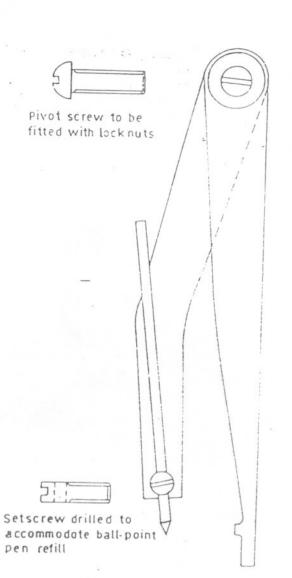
Odd-leg marking gauge (components & assembly) (Clause B_3.1)
